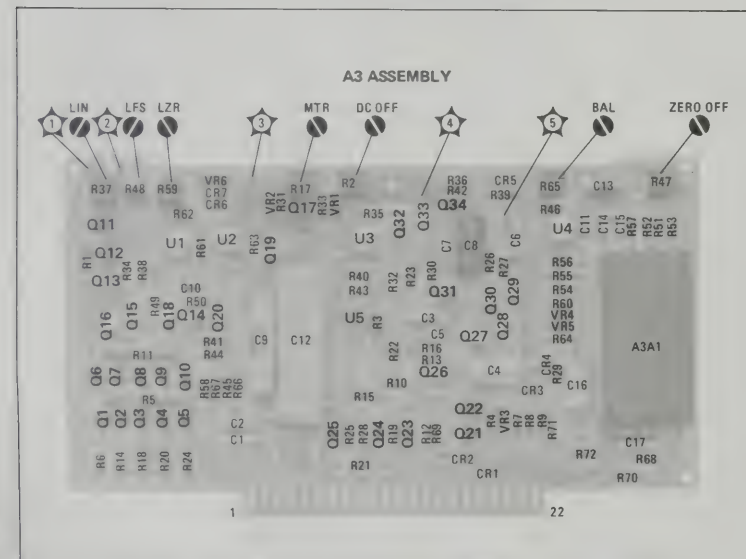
A3 A-D Converter Assembly Components, Test Point, and Adjustment Locations
